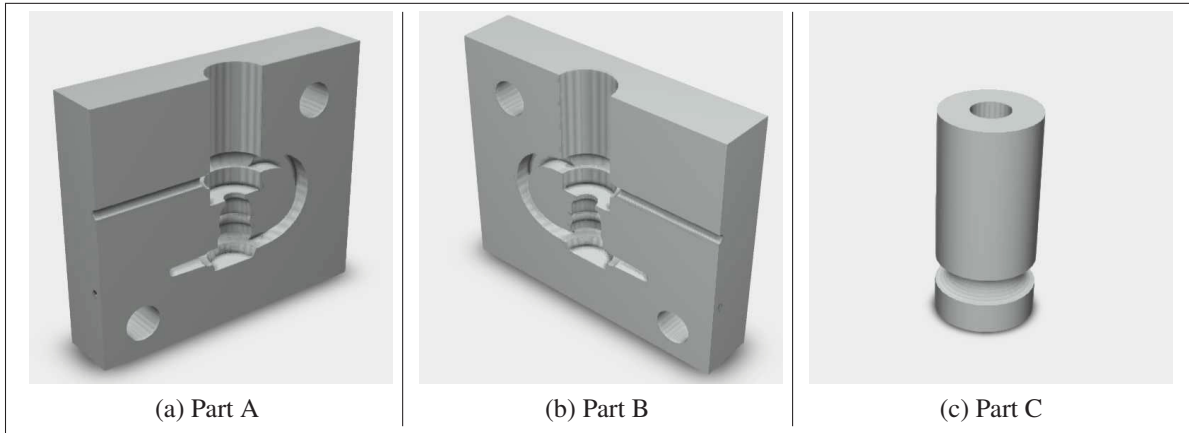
Molding parts for the fabrication of the silicone cap
